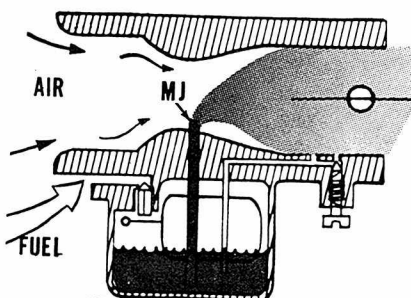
View of carburetor showing disc type throttle valve completely open for high speed operation.
